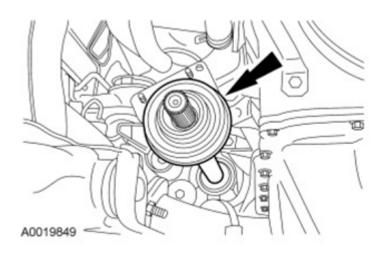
Locating Intermediate Shaft Courtesy of FORD MOTOR CO.
